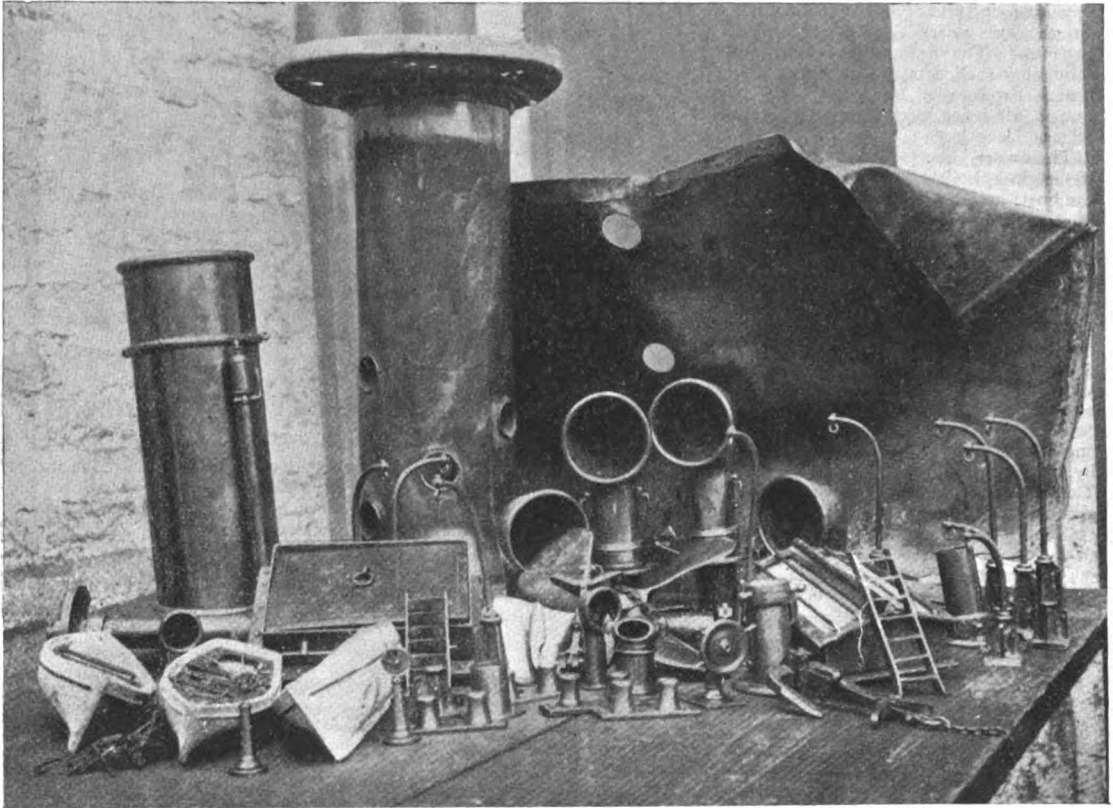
BOILER AND FITTINGS OF THE WRECKED MODEL STEAMER.
